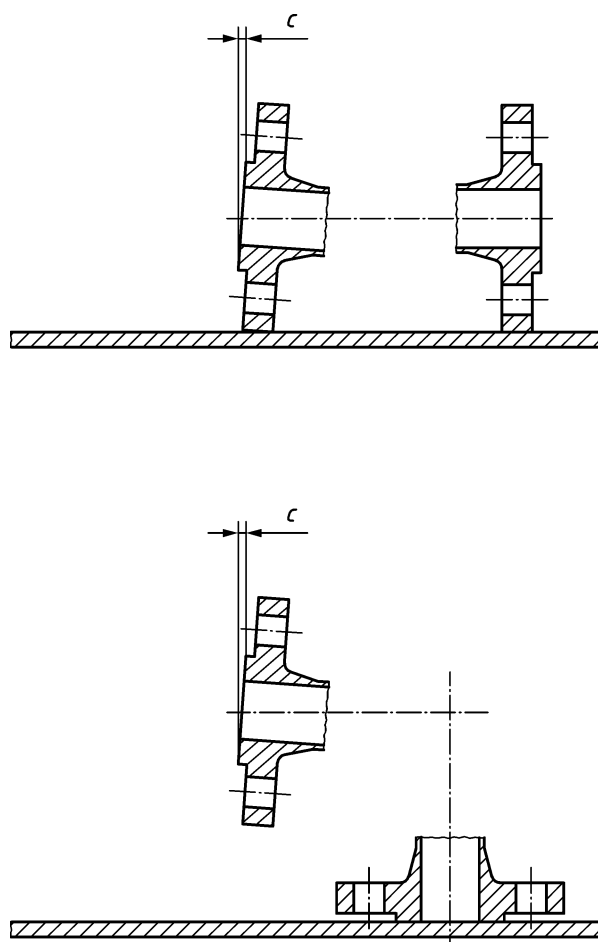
Tolerances on parallelism and perpendicularity
